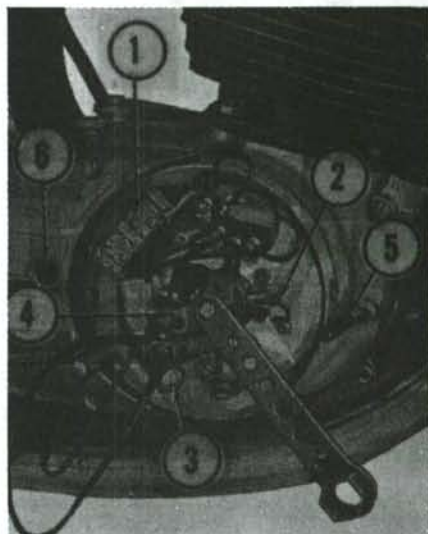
View of right side with cover removed. Refer to text for adjusting the ignition timing.
